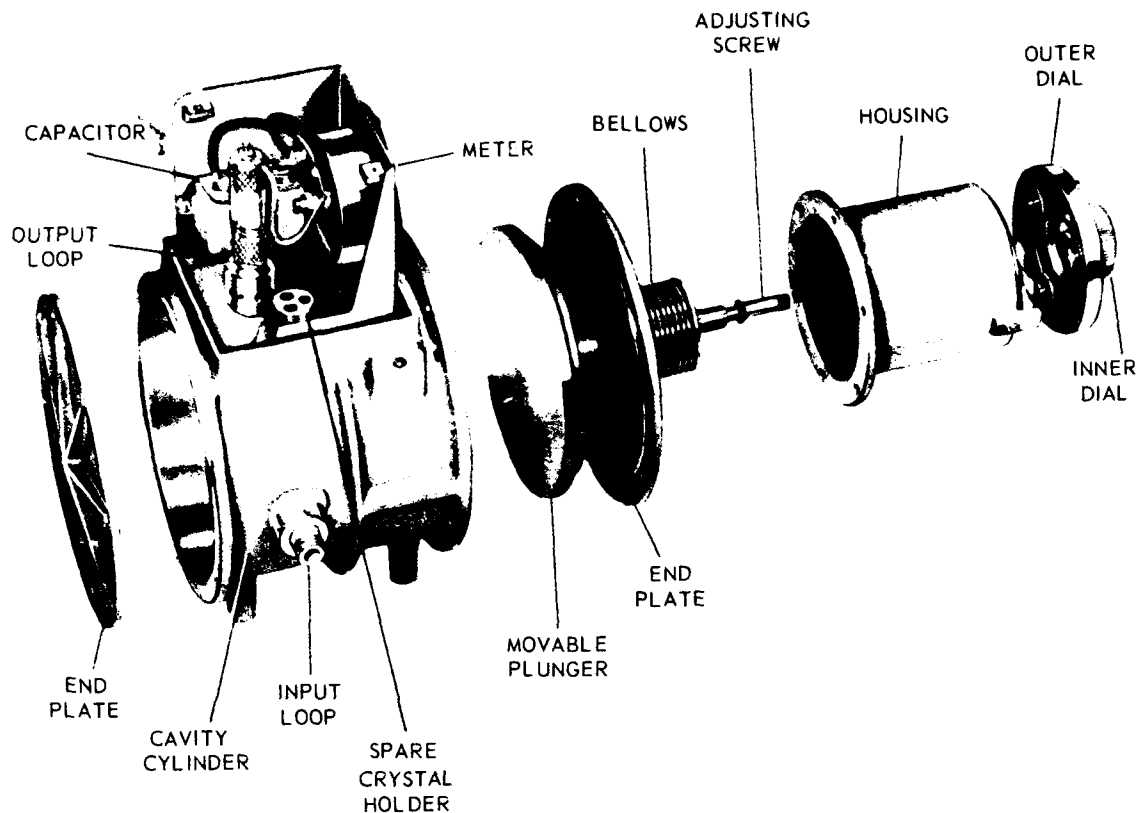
Exploded view of the TS-275/UP echo box.
